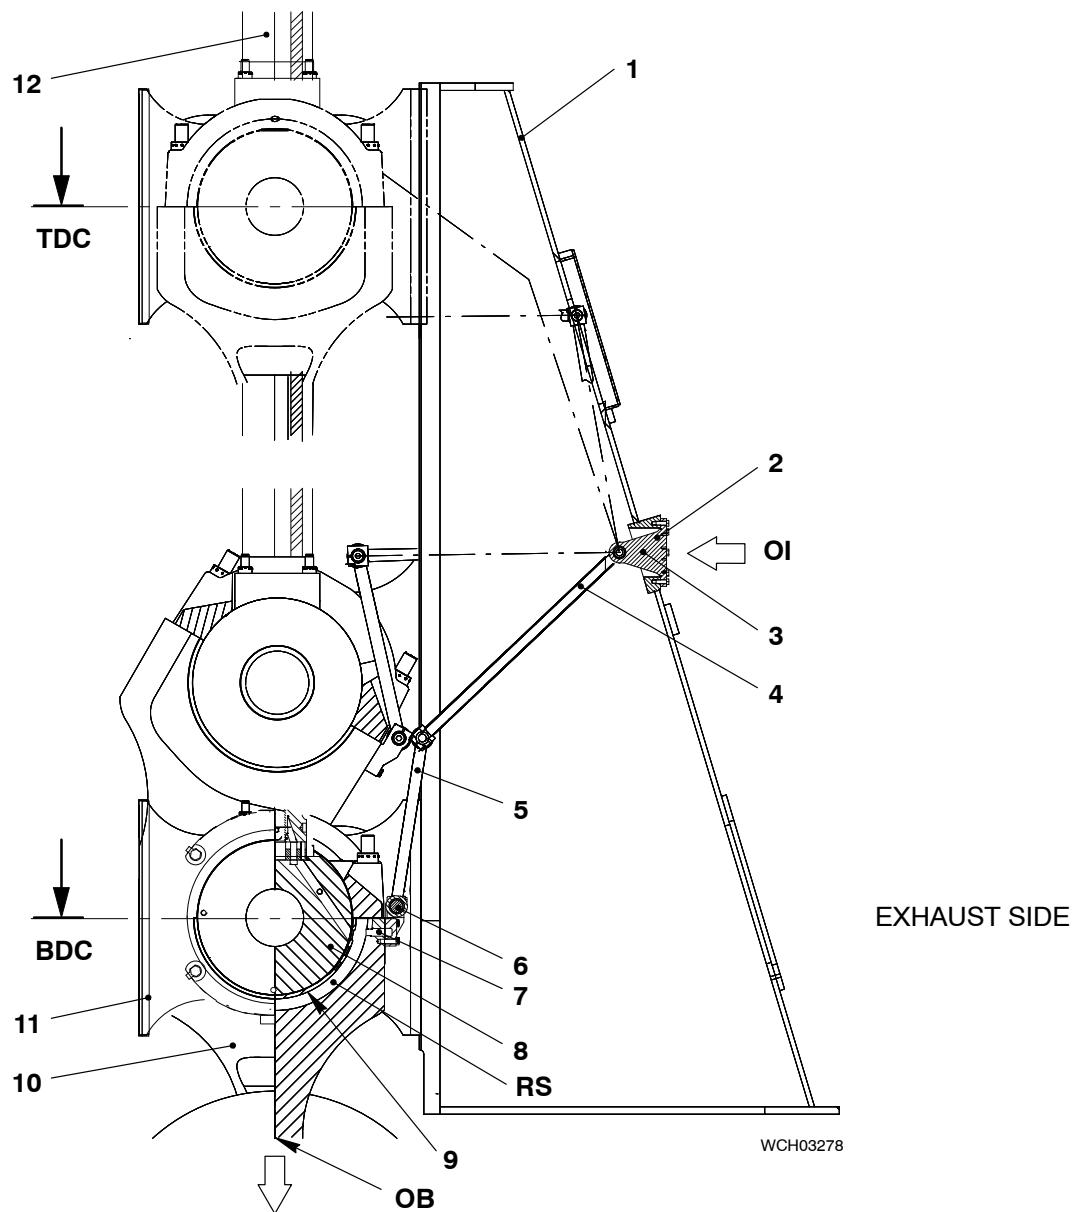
Crosshead Lubrication and Piston Cooling – Location
